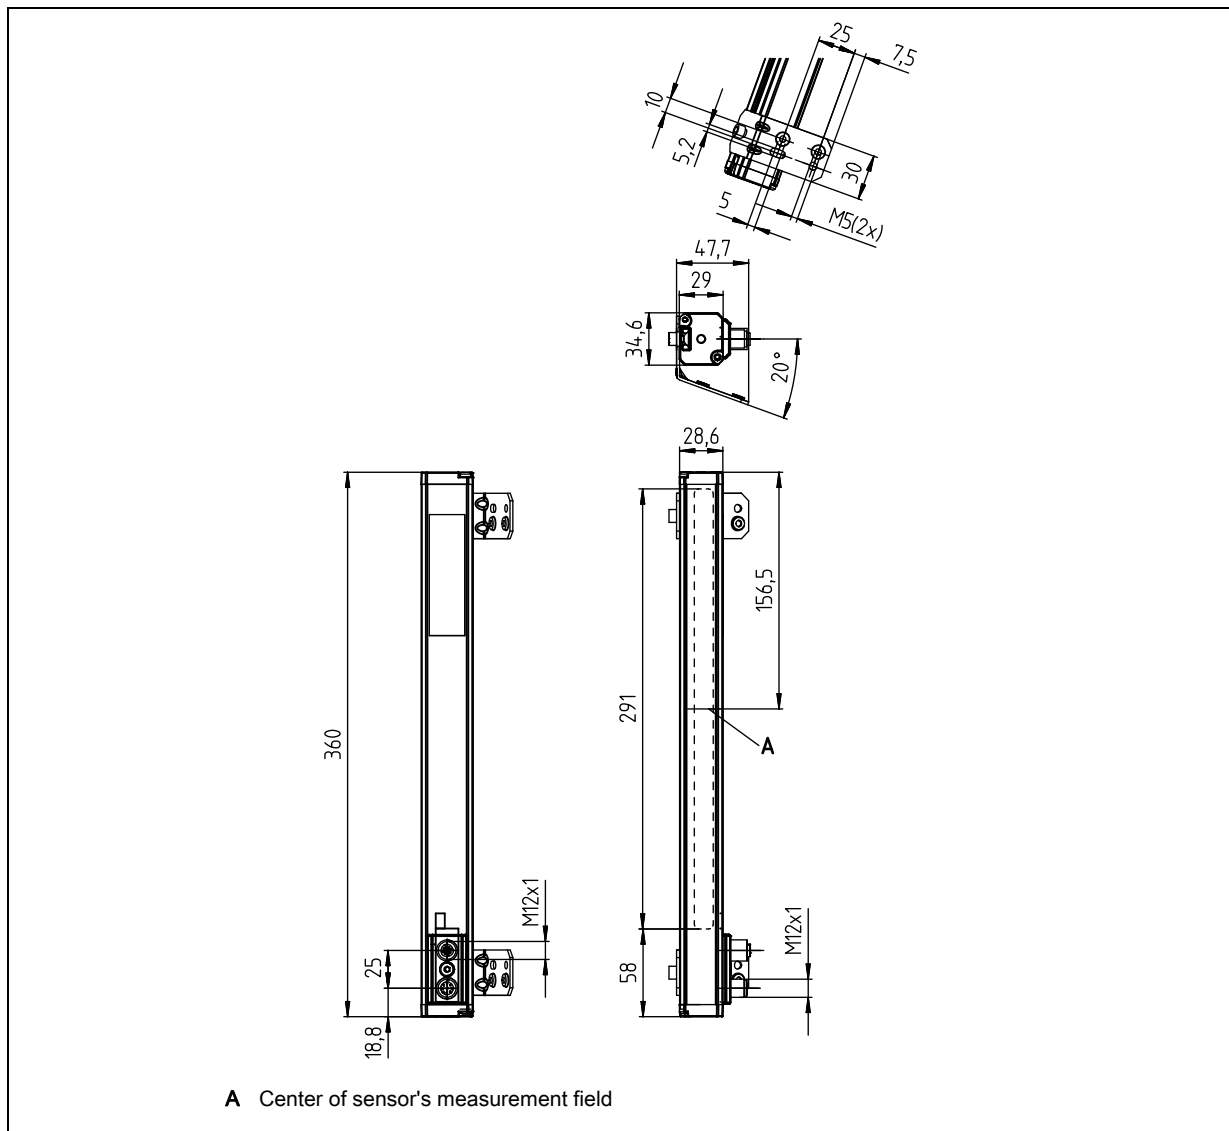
Dimensioned drawing OGS 600-280/CN-M12 – long version
